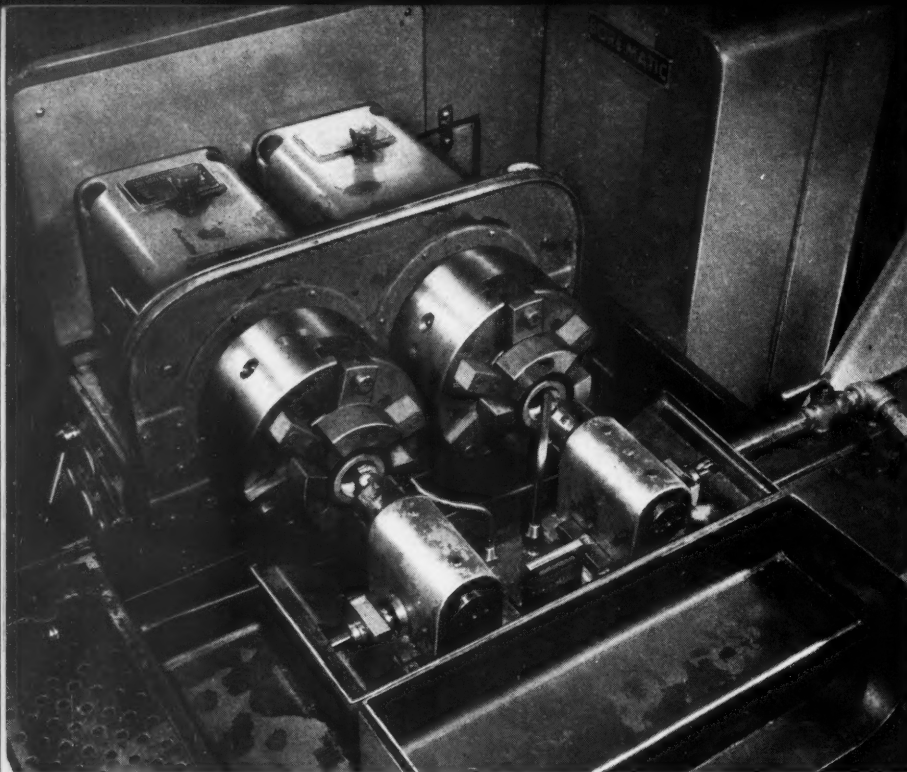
Bores of rubber-covered steel roller guides are machined to size within plus or minus 0.0003 inch in this set-up
